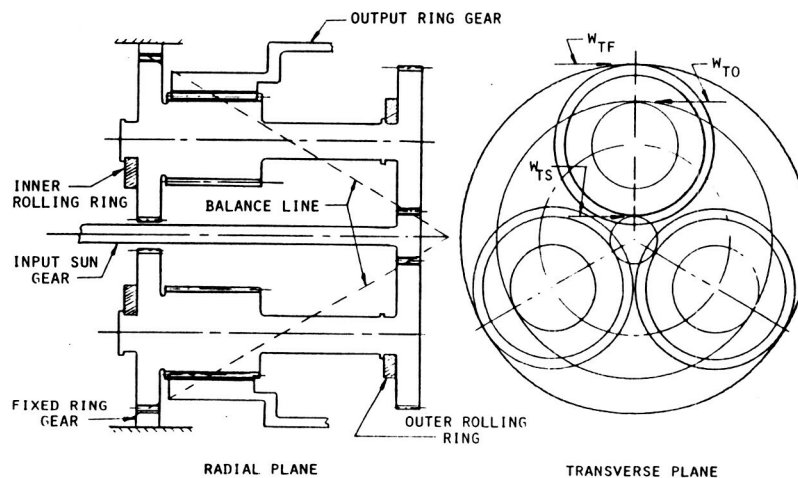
Schematic arrangement of self-aligning, bearingless, planetary gear - radial and transverse planes.
